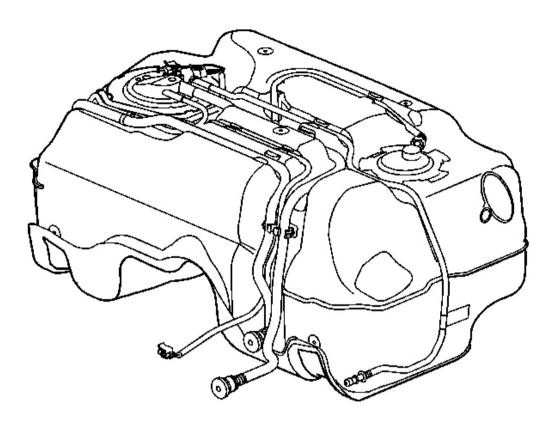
View Of Fuel Tank Courtesy of GENERAL MOTORS CORP.
